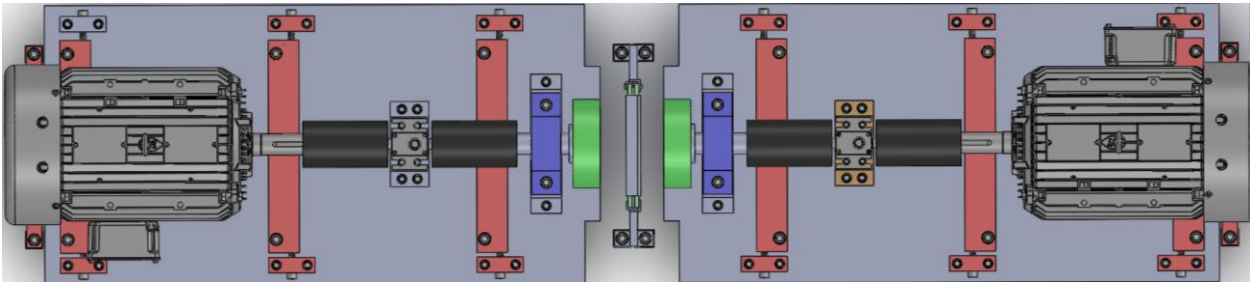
SolidWorks Model of Testbed and Prototype – Aerial View.
